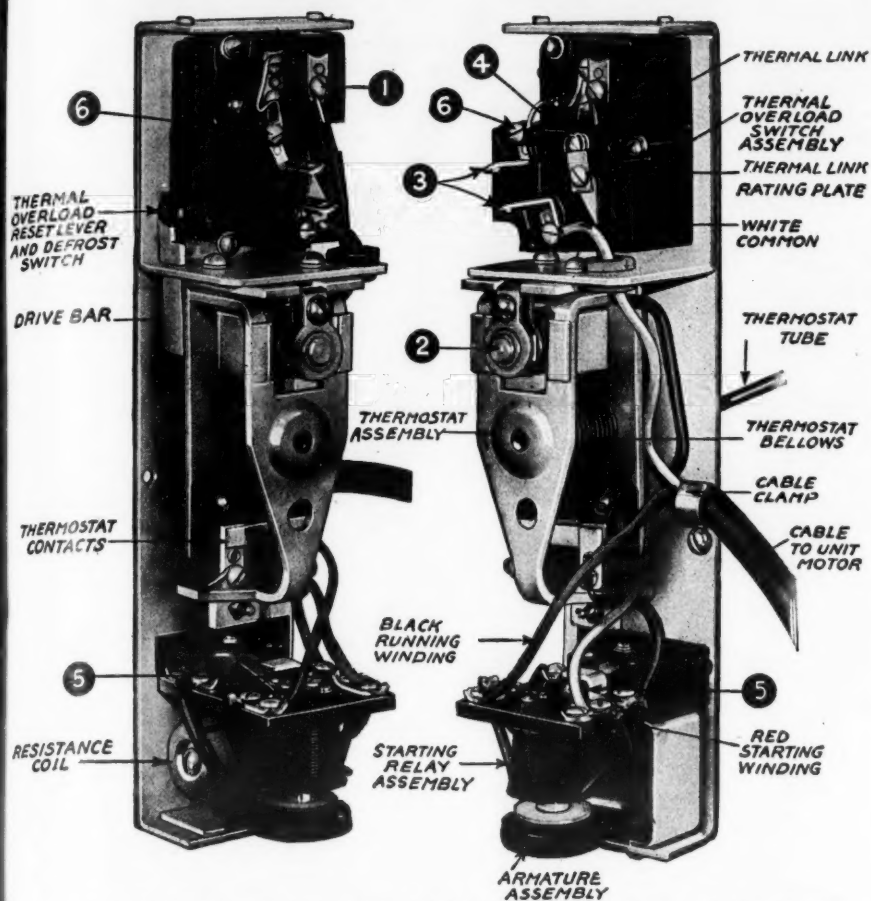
(left) and Fig. 329 (right) show two views of the Cutler-Hammer control used in Servel Hermetic units. This control consists of a thermostat assembly, thermal overload switch assembly, and starting relay assembly.
